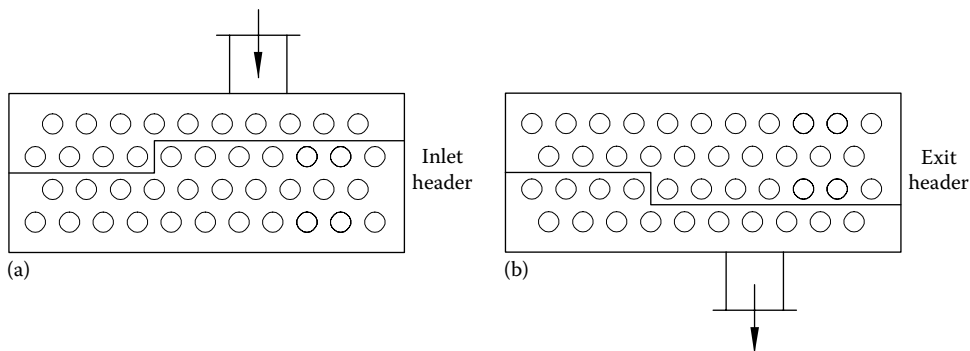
ACHE: (a) inlet or front header and (b) exit or rear headers with three passes arrangement on the tubeside.
